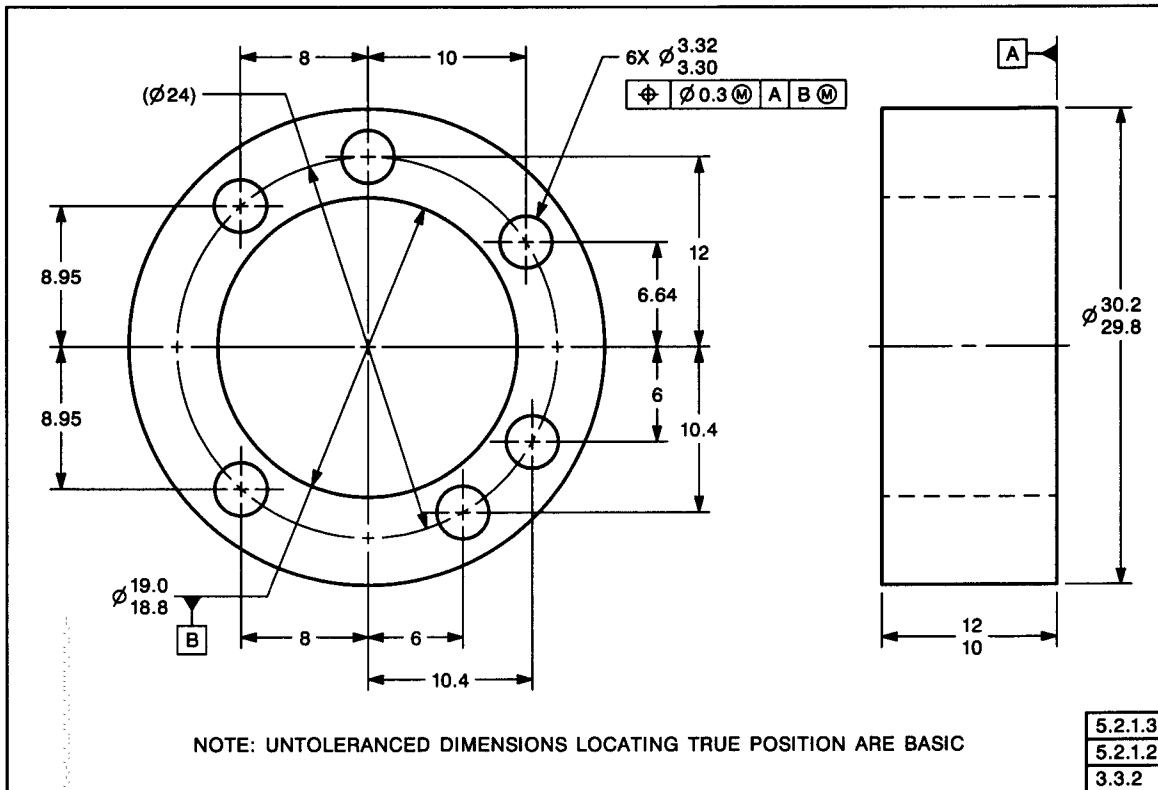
POSITIONAL TOLERANCING WITH DATUM REFERENCES
